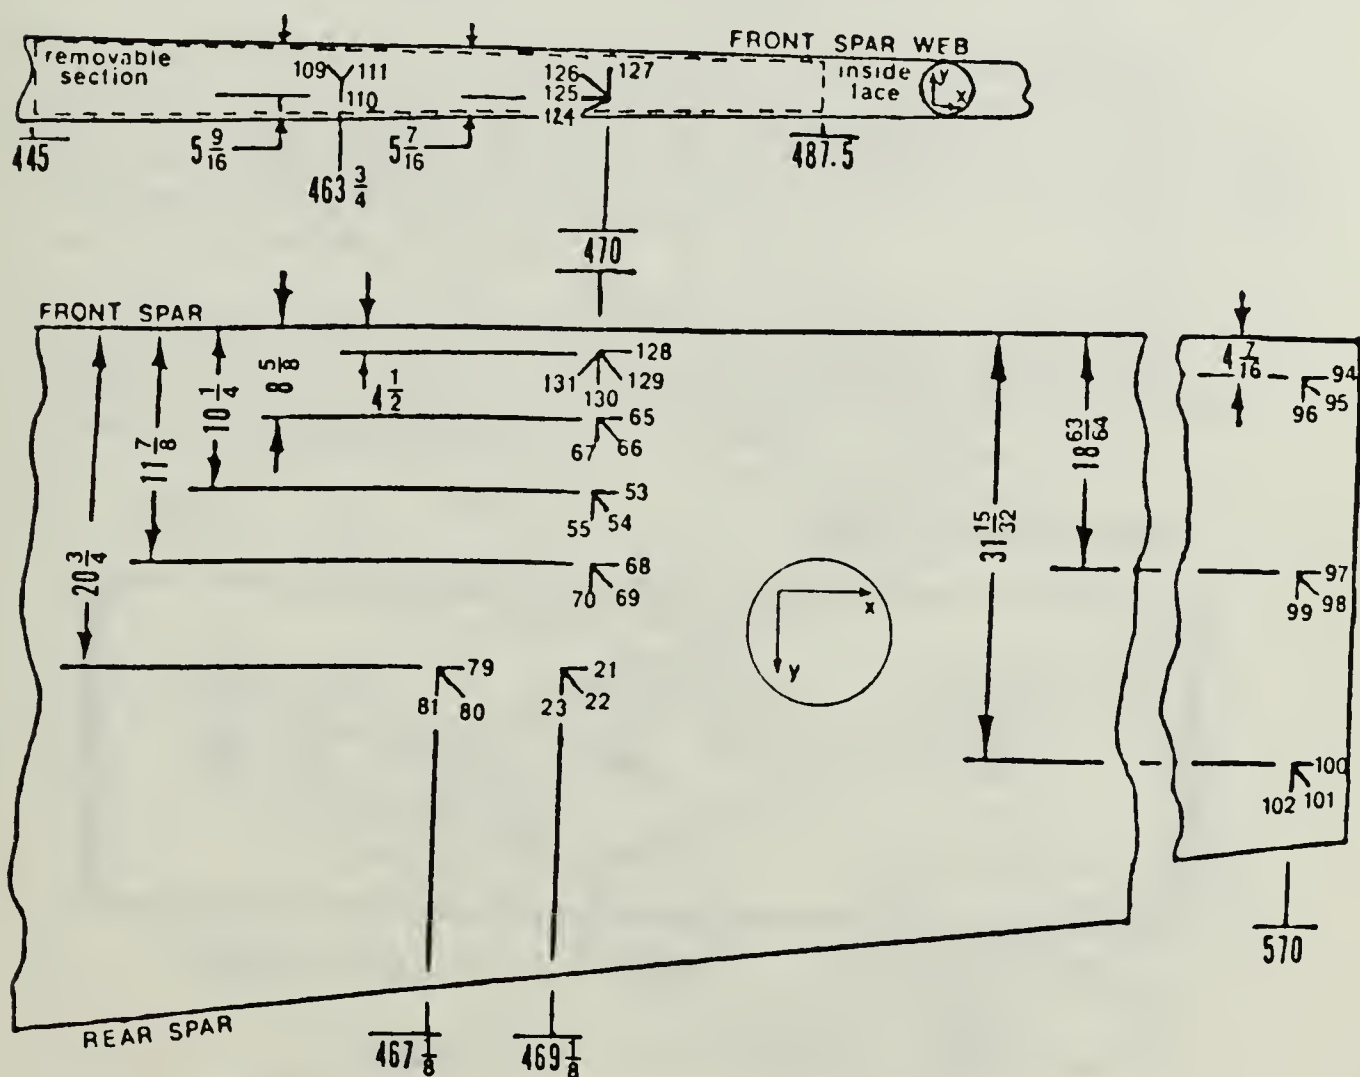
A P2V Starboard Wing, Strain Gage Locations, Bottom of Test Section
